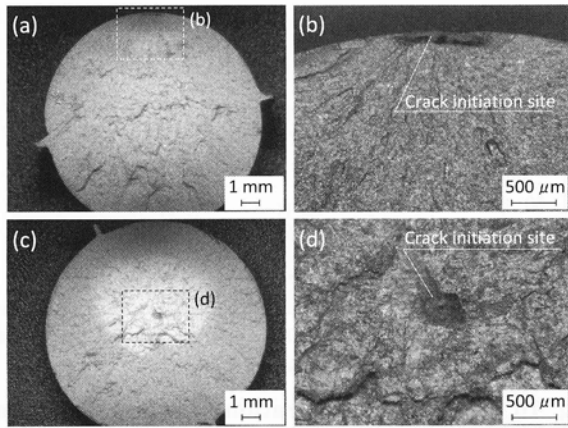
Fracture surfaces under uni-axial fatigue ($R=-1$) of material B: (a), (b) as-cast ($\sigma_a=105$ MPa, $N_f=267,000$ cycles) and (c), (d) FPB treated ($\sigma_a=114$ MPa, $N_f=801,000$ cycles). (b) and (d) are magnified images of crack initiation sites in (a) and (c), respectively.
